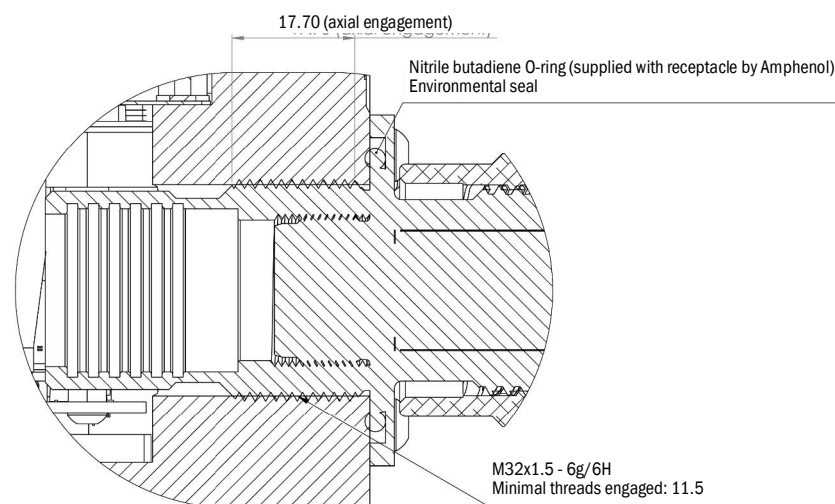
Threaded flame path between Ex receptacle and Ex enclosure body
